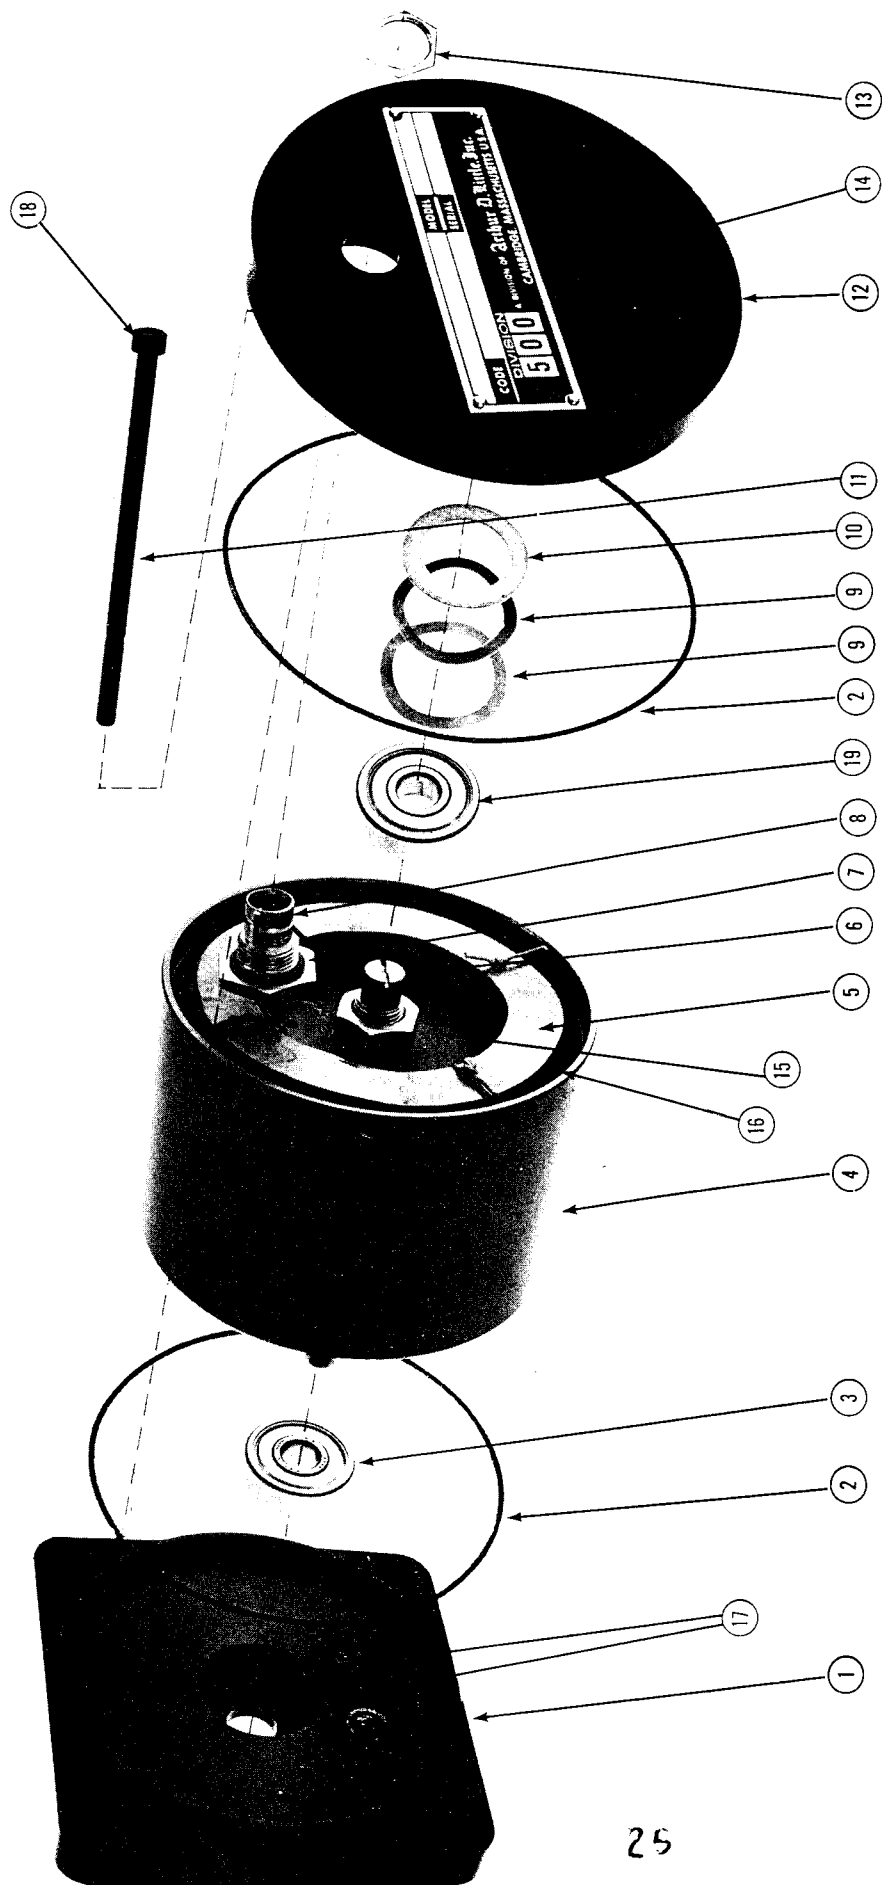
EXPLODED VIEW OF THE DRIVE MOTOR
